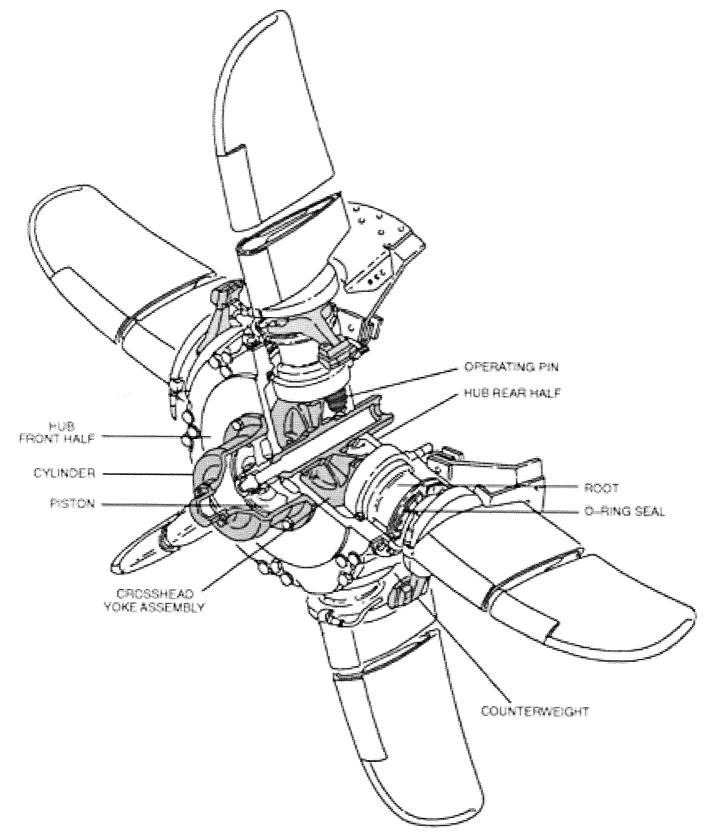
Propeller Blade Pitch Changing Mechanism (Dowty-Rotol)
